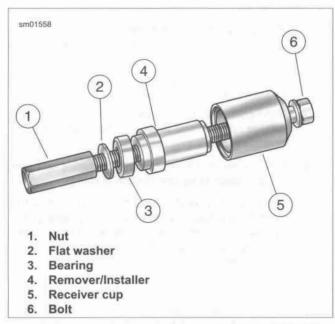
Connecting Rod Bushing Remover/Installer (Part No. HD-95970-32D)
